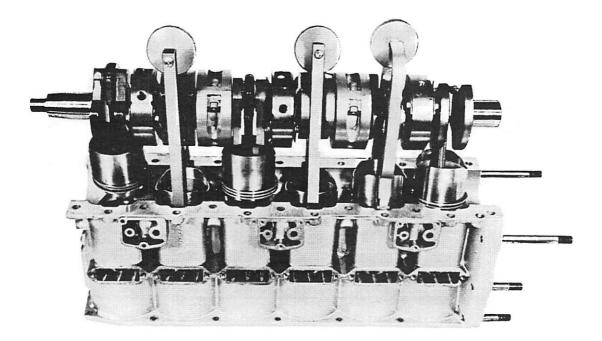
Placing Crankshaft Assembly and Compressors in Cylinder Block
